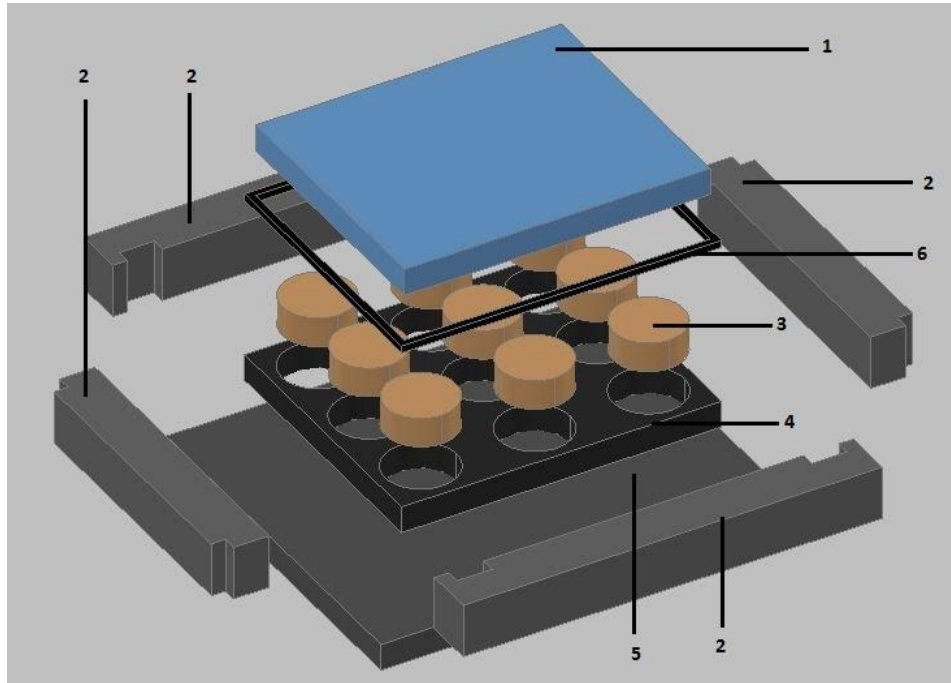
Chart. Three dimensional view of the Assembly Design V (disassembled).
